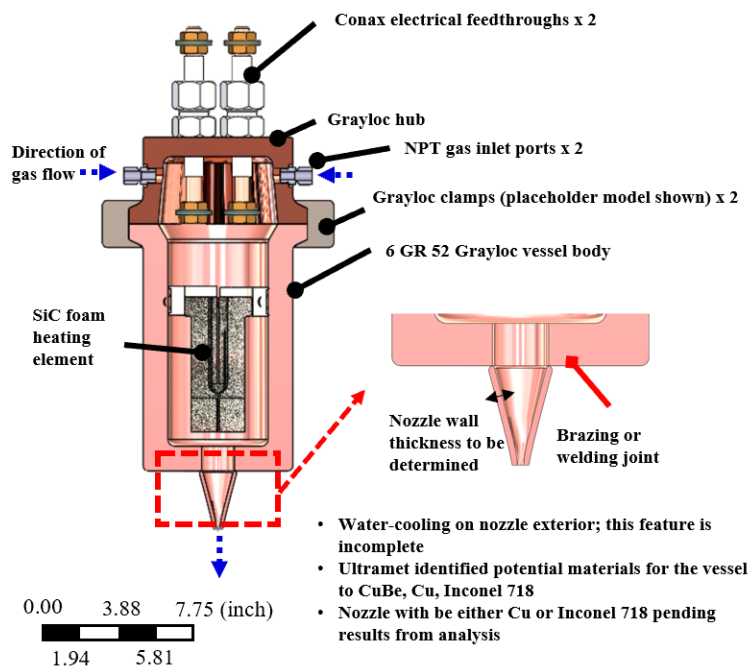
Design 1, revision 2 of the nozzle exhaust system
